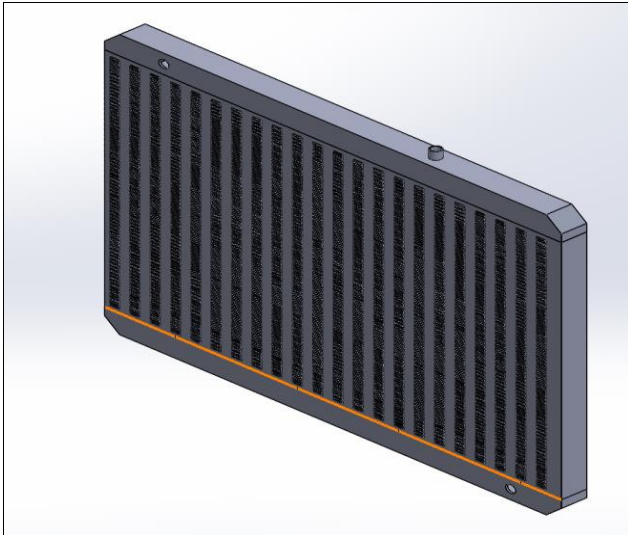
3D CAD Model of Rectangular Shaped Radiator: (Existing Design)
